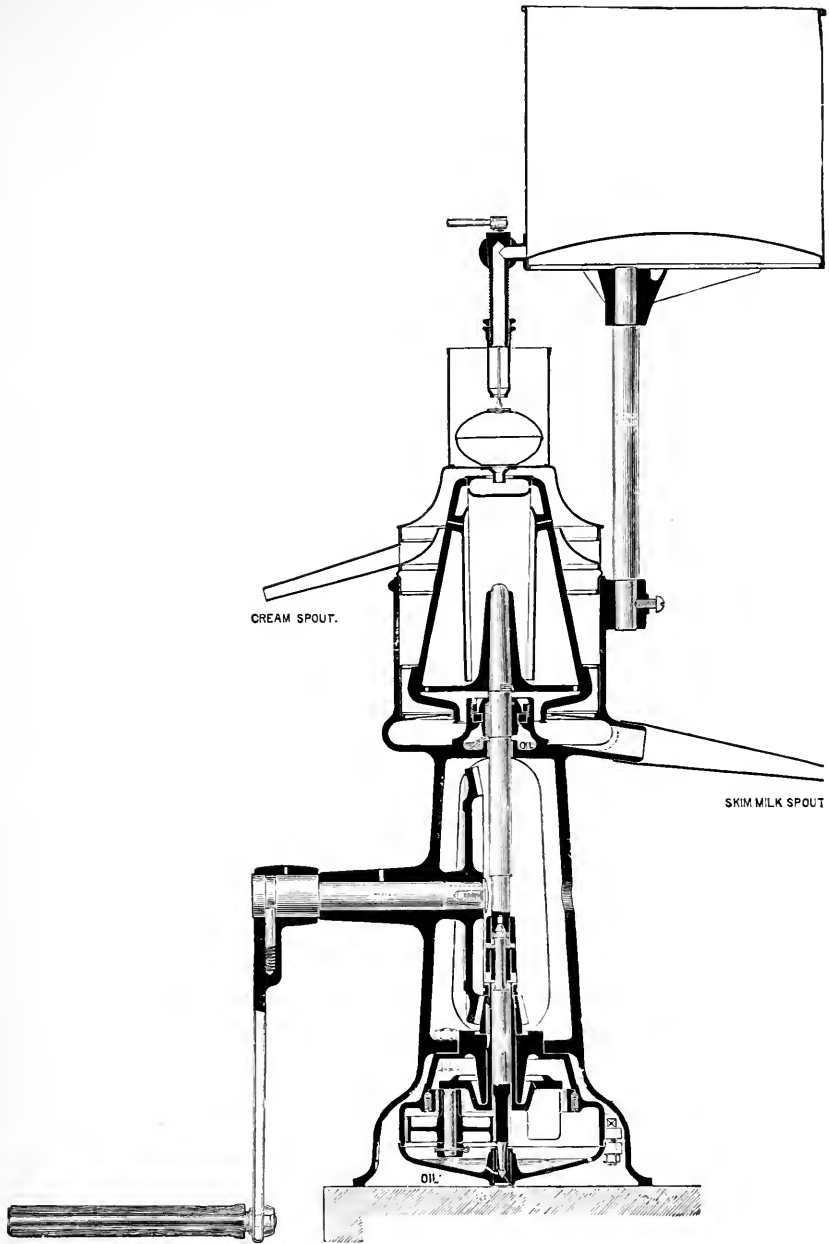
Sectional View of Victoria Hand-power Cream Separator.
